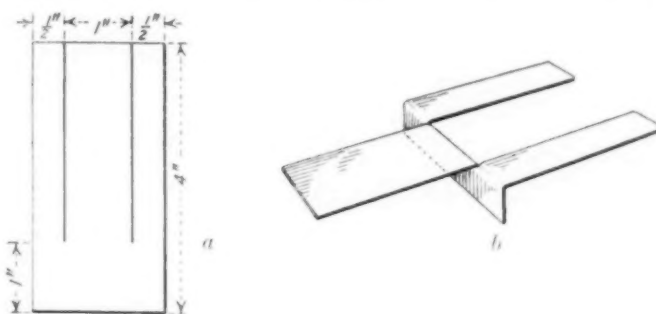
TEST PIECE FOR TEARING TESTING (1. BEFORE BENDING; 2. AFTER BENDING)
